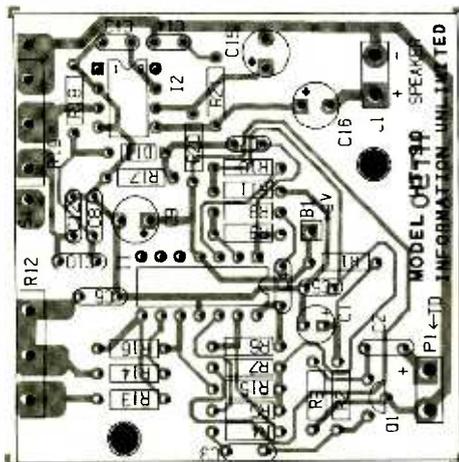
Parts-placement diagram. You can build this circuit on perfboard, but you're much better off using a PC board.
